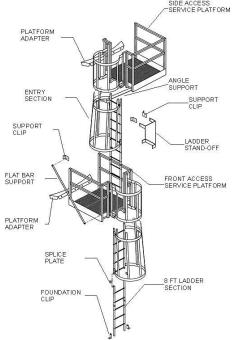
Typical Side and Front Access Service Platform and Ladder Assembly
